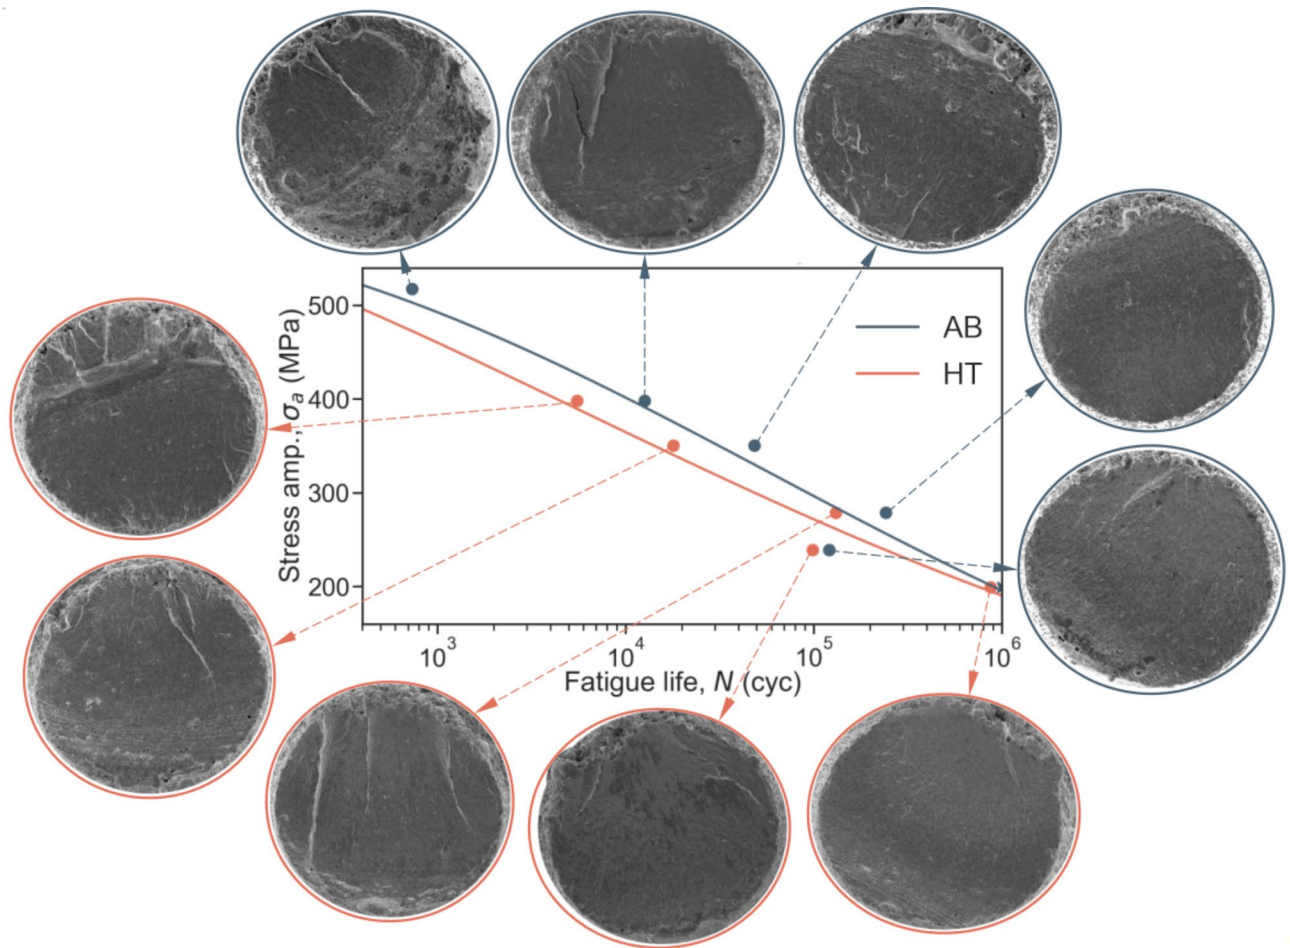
Fracture surfaces of SLM 316 L stainless steel 0-degree samples from fatigue tests conducted under AB and HT conditions.
